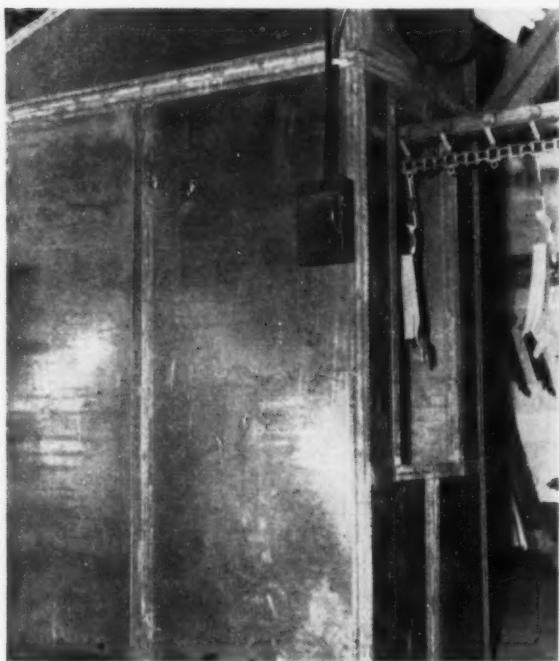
Parts lose heat fast in unusual sheetmetal cooling tower. Pieces cool to about 100°F before final painting.
